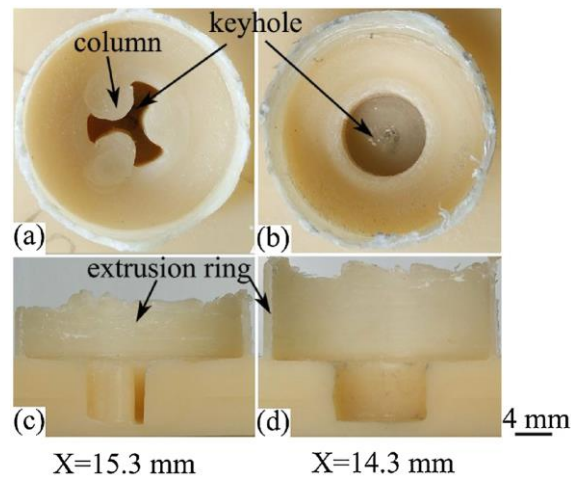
The views (a), (b) from the top (c), (d) of cross sections welded by triflute and cylindrical pin [63].
